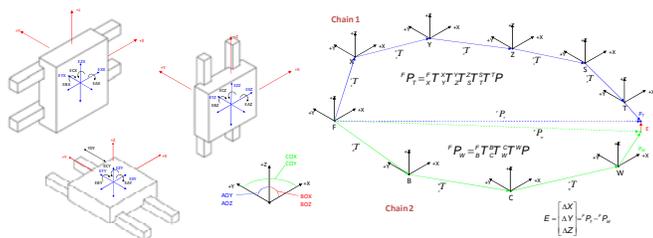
Estimating machine tool static errors (kinematic and loads)
